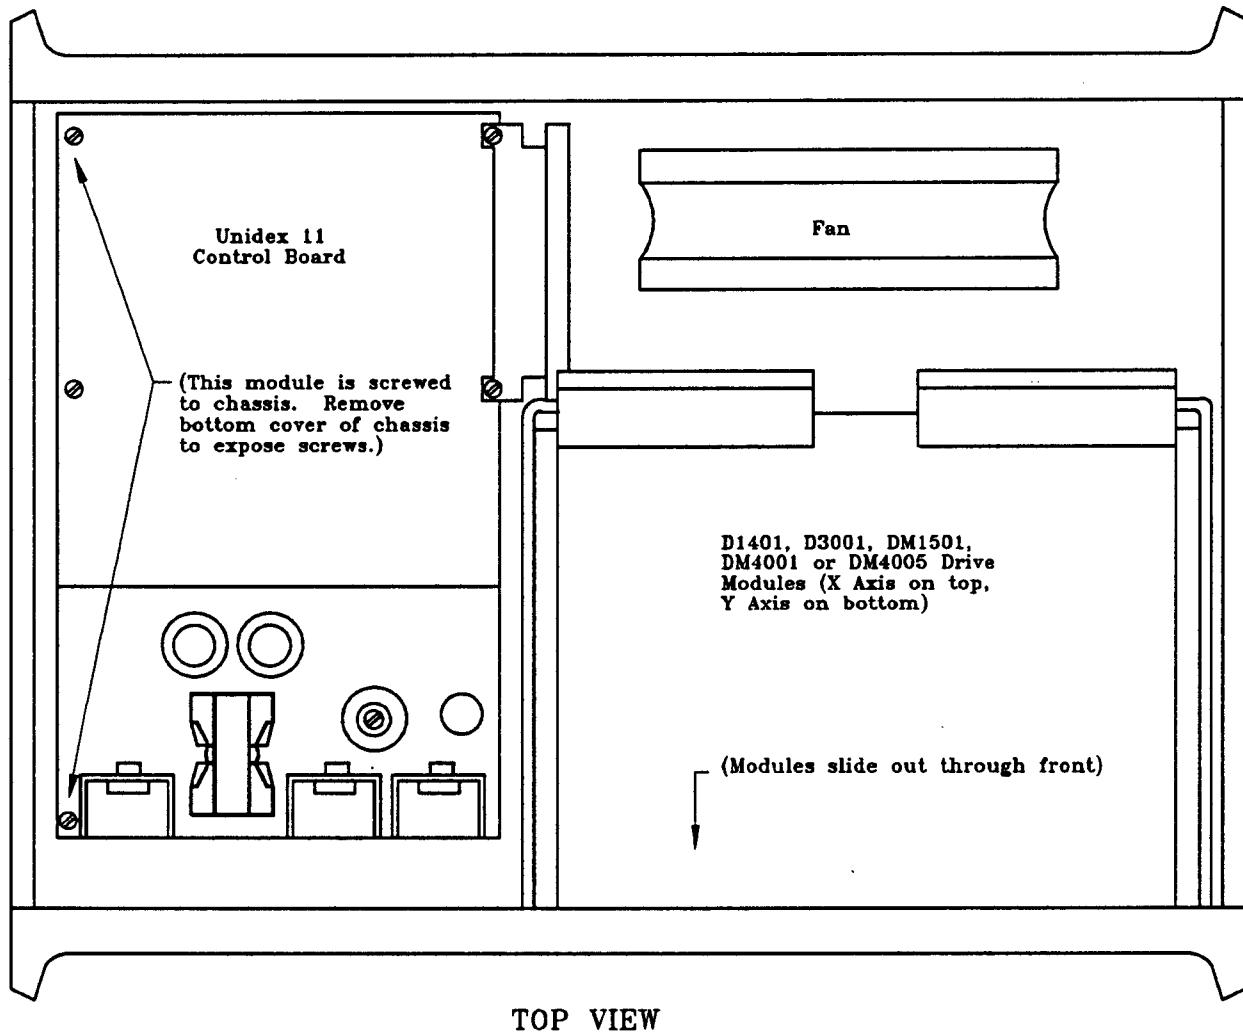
Outline of U11M Chassis with Top Cover Removed
